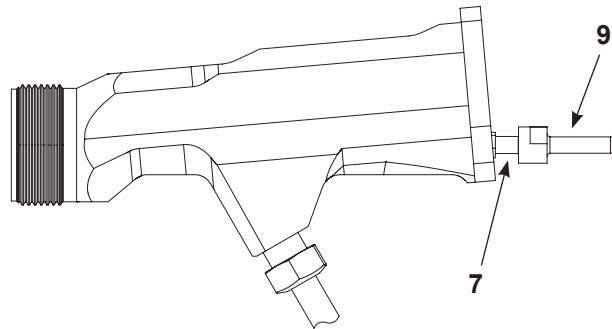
Packing Cartridge Replacement - Removing Trigger Puller
